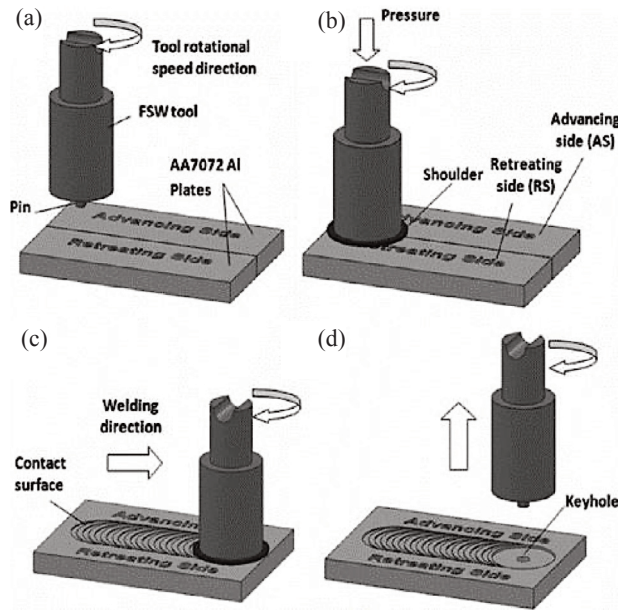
Presentation of the different steps of the FSW process: (a) start, (b) penetration, (c) welding and (d) finishing [3].
